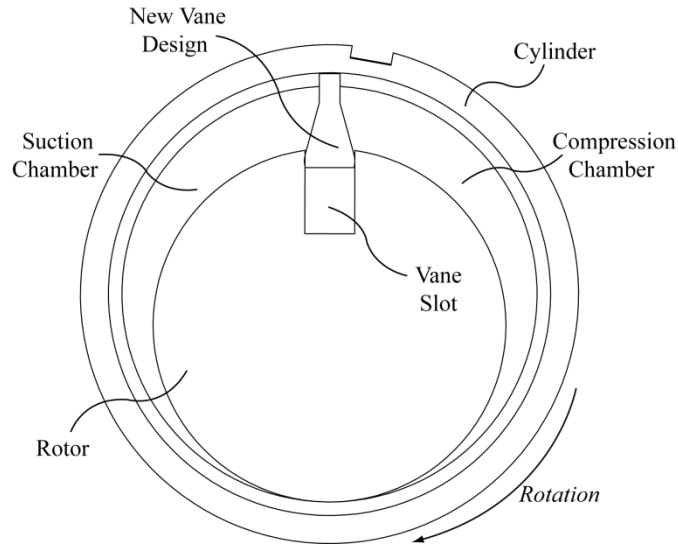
RV Prototype Cylinder-Rotor Assembly Cross-Section
